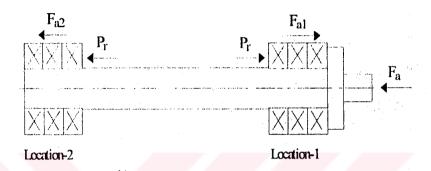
A Schematic Representation of an Axially Preloaded Bearing Assembly
